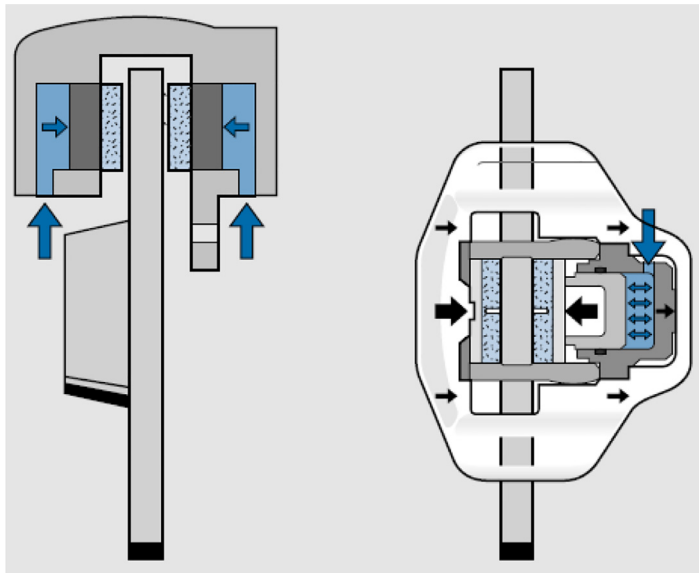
Disc brake with fixed caliper (left) and floating caliper (right) [18].
